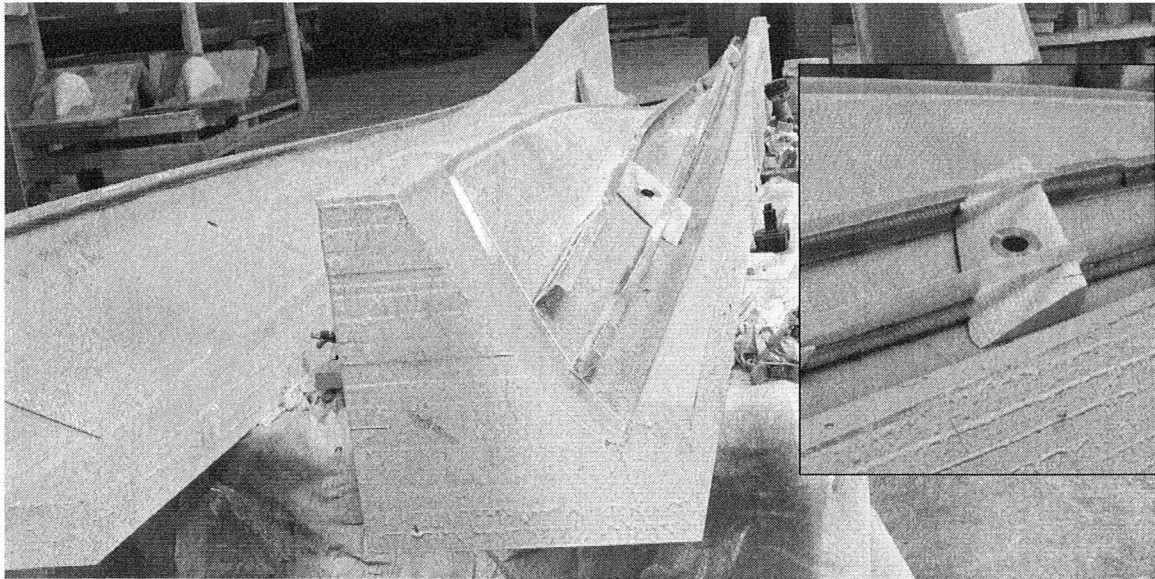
Manufacturing of canted blades showing the inner skin sitting in the mould with spars and ash insert glued in place.
